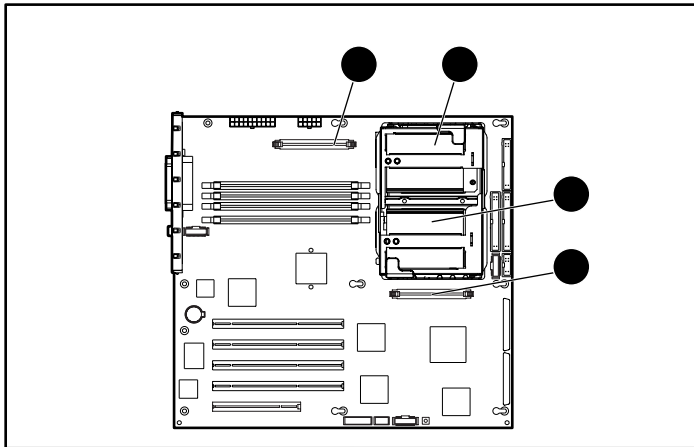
Locating the processor sockets and Processor Power Module (PPM) slots
